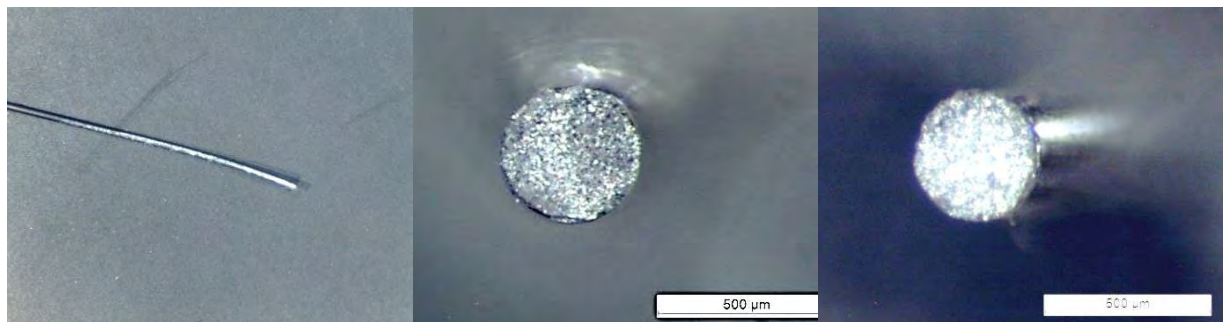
Specimen 1: Surface wear of the nitinol actuating wire (left) with the proximal (centre) and distal (right) fracture surfaces of the wire.
